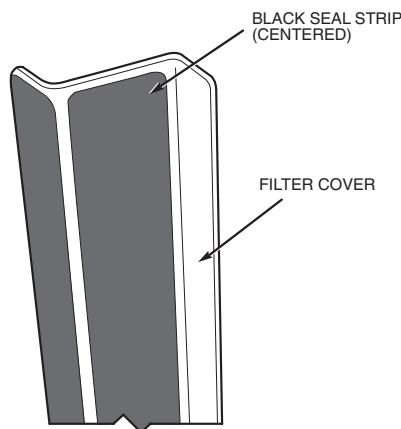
Adding Seal Strip to Sides of Hood Top Mounting Flange
